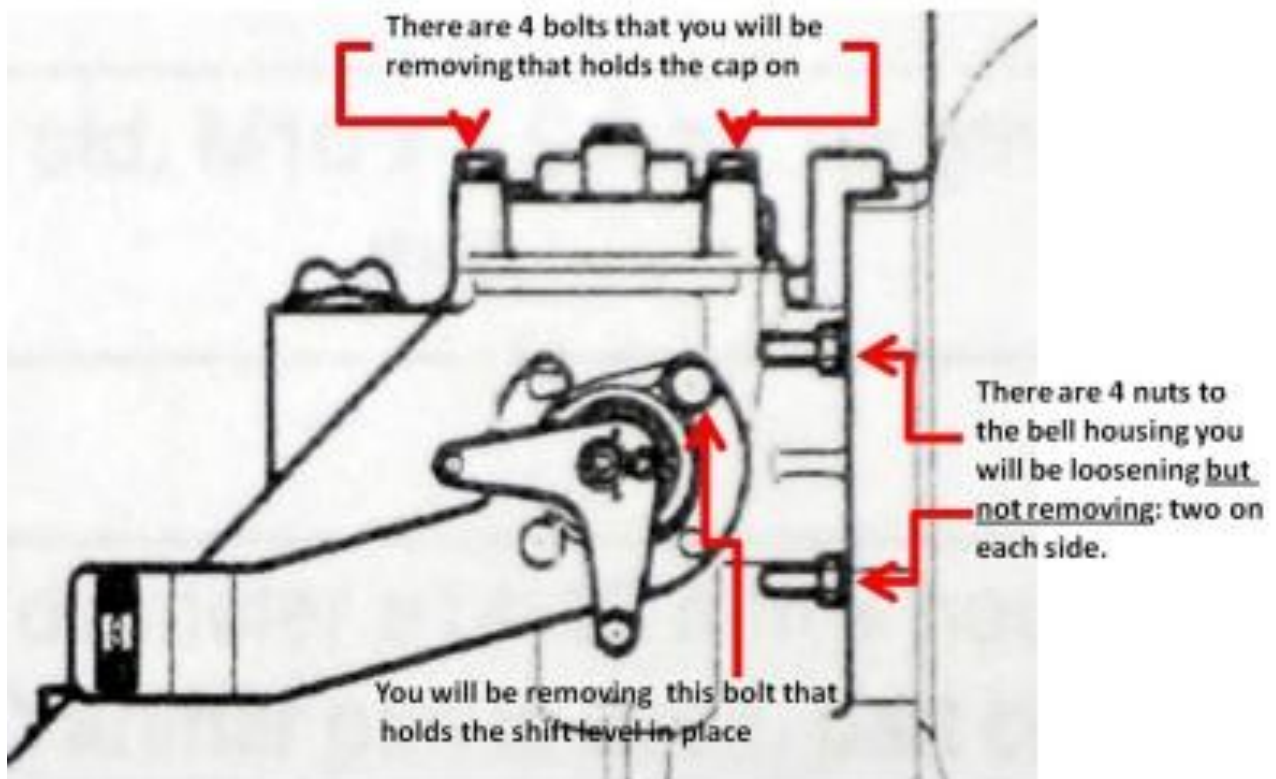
Step 1: Remove Upper Gear Tightening Bolts (4) And Upper Gear Cover
